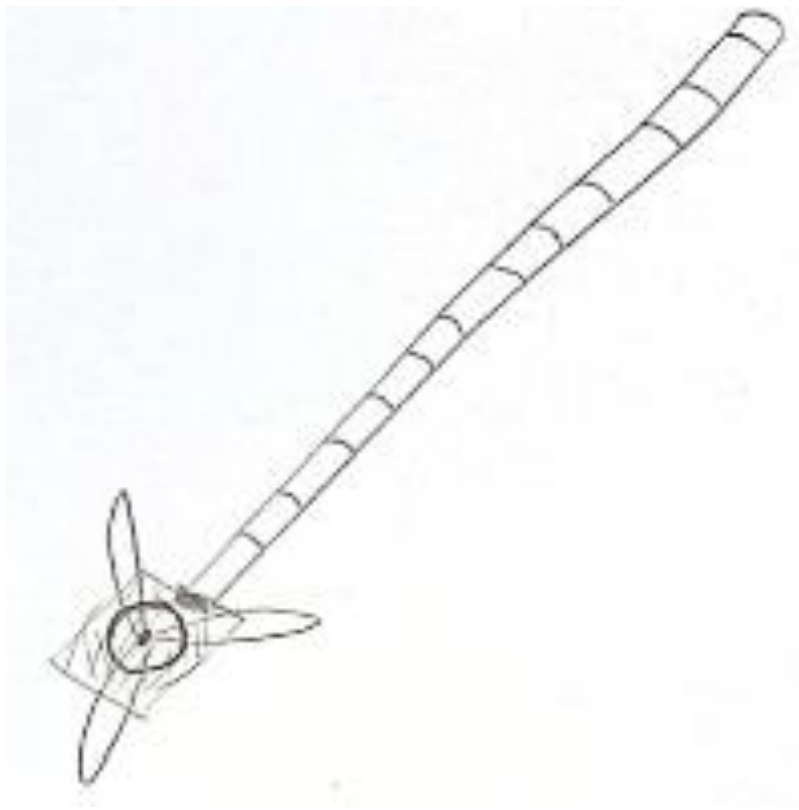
Tubular carbon fiber arm with 3D printed end cap
